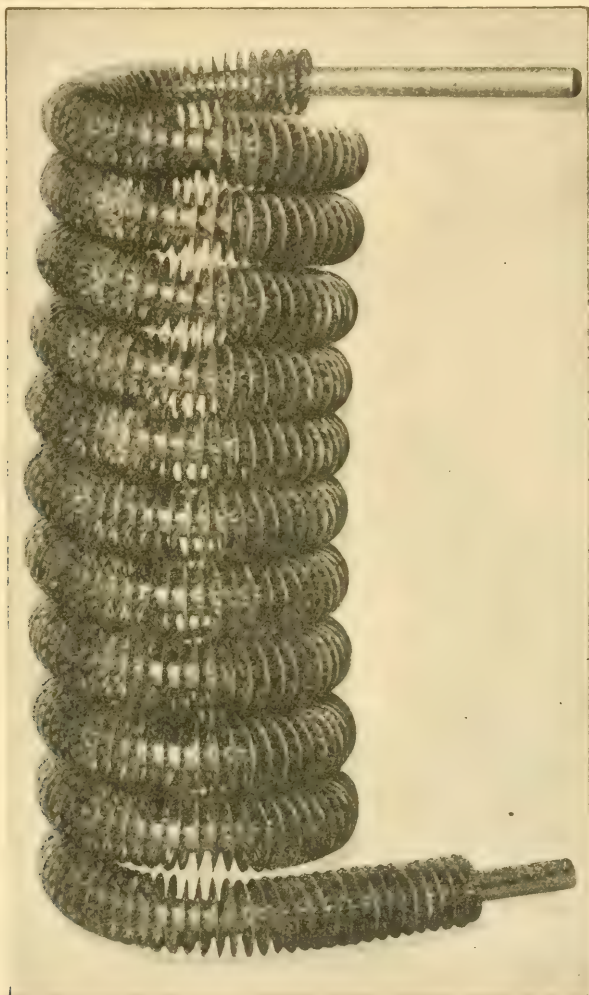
SHOWING HOW SPIRAL FIN TUBE CAN BE SHAPED.
